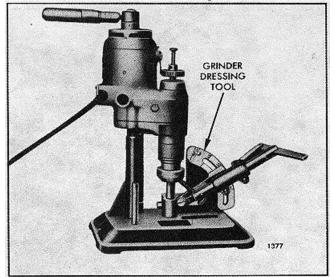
Grinding Wheel Dressing Tool of Set J 8165-1
